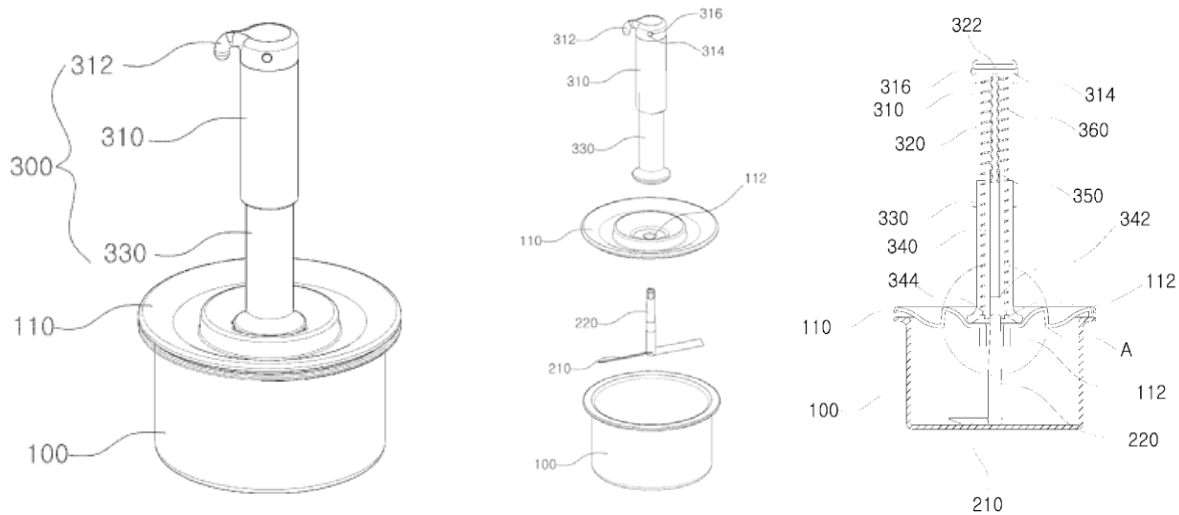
The patent drawing of hand-operated food grinder shows the machine's key components. Four key parts are the handle module, lid, grinder blade, and food container. The rightmost drawing shows the cross-section of the handle module, which demonstrates the machine operation of pushing down the handlebar to rotate the blades.
